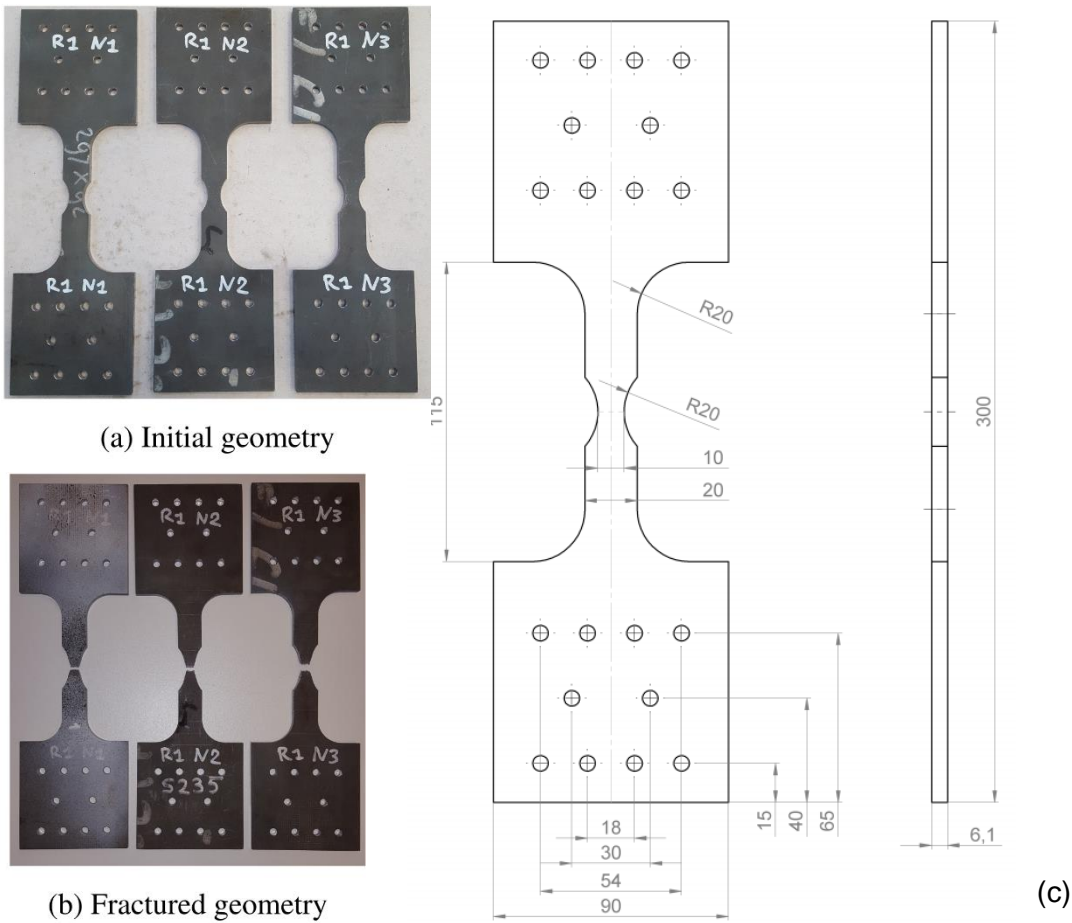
Pictures (a) before and (b) after testing and (c) drawings in mm of notched tensile test specimens from Bijleveld [2018]
